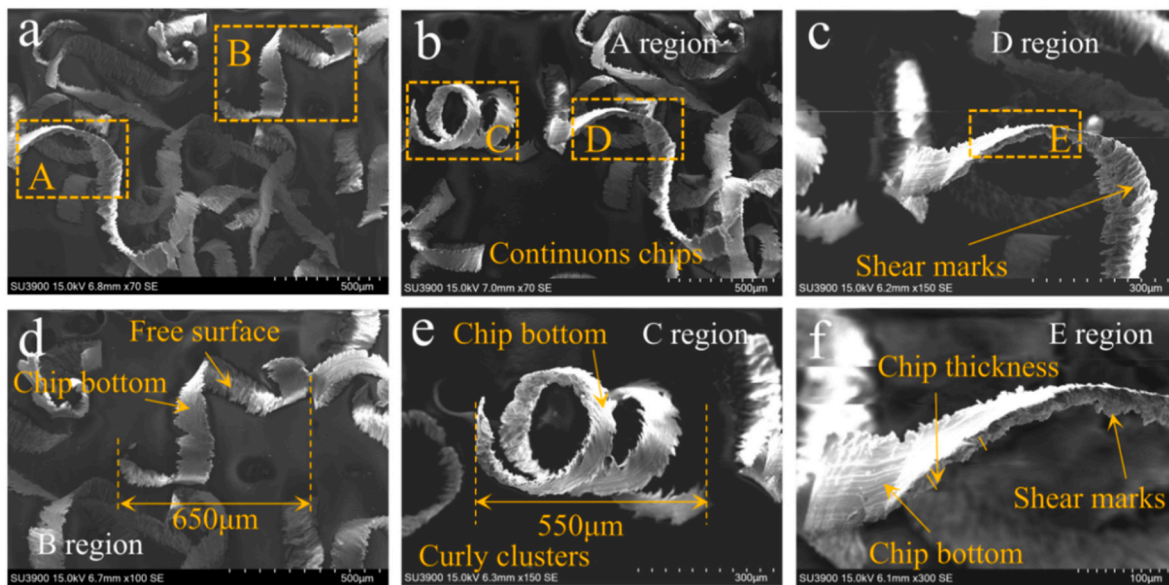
Chip morphology of UEVC: (a) Overview of chip morphology, (b) Partially enlarged view of (a), (c) Cross section of chip morphology and chip free surface, (d) Chip bottom and chip length, (e) Chip length, (f) cross section of chip morphology.
